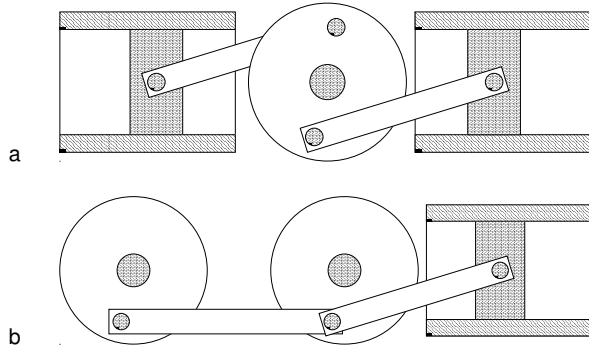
(a) a sample target drawing of a two piston and crankshaft assembly, and (b) a sample target drawing with two crankshafts and a single piston. In both cases, the source is from figure 1(a).
